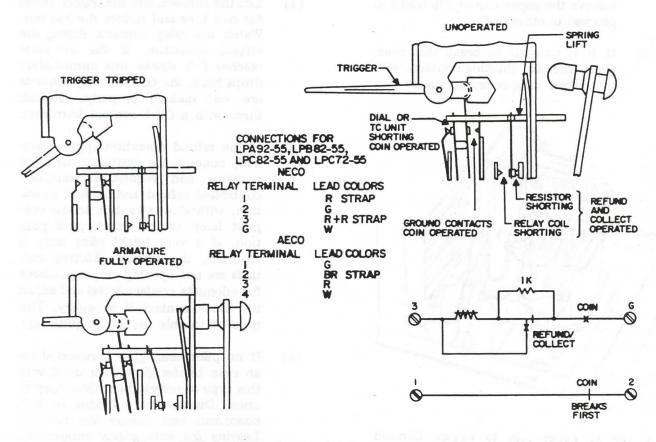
Coin Relay Contact Spring Assembly and Schematic.
